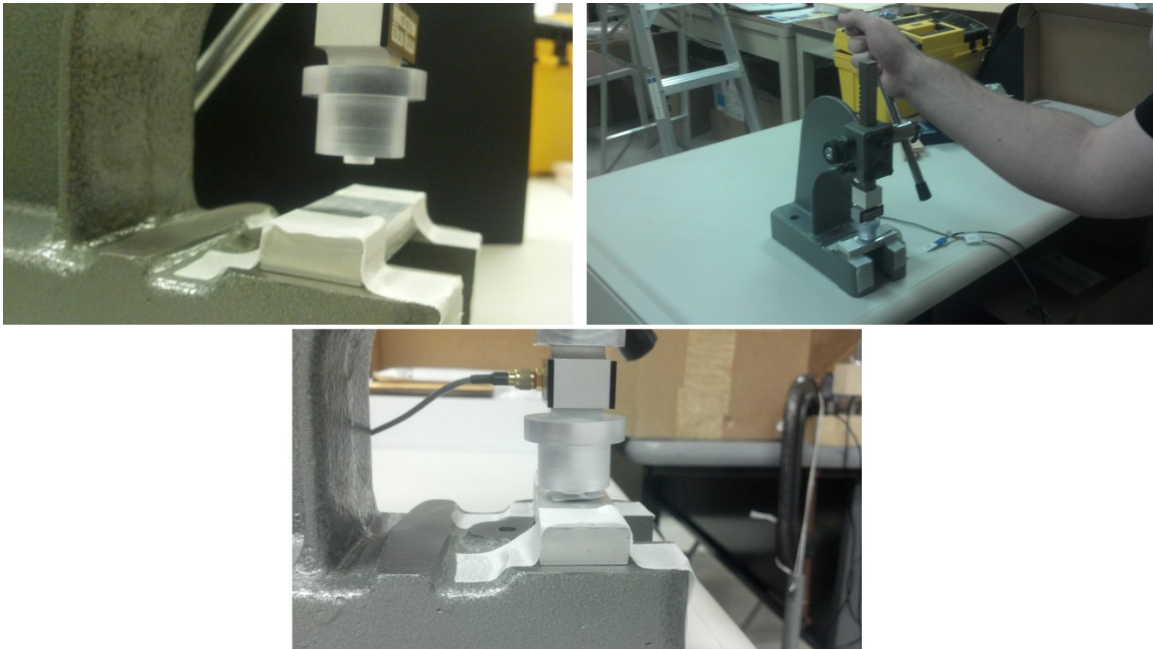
Left - Fixture for localizing force. Right - Arm press. Bottom - Arm press calibration method
